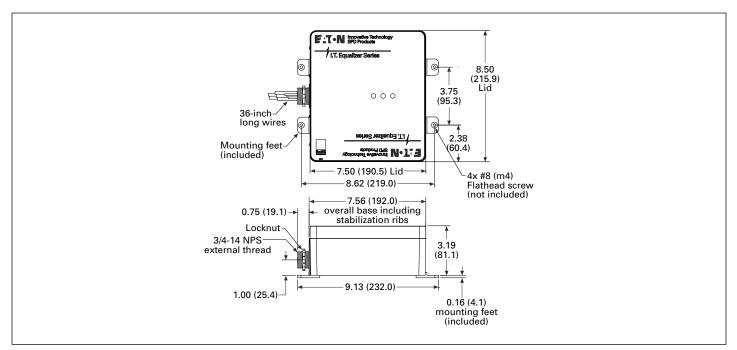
P2 enclosure, NEMA 4X with mounting feet dimensions, weight = 4 lb
